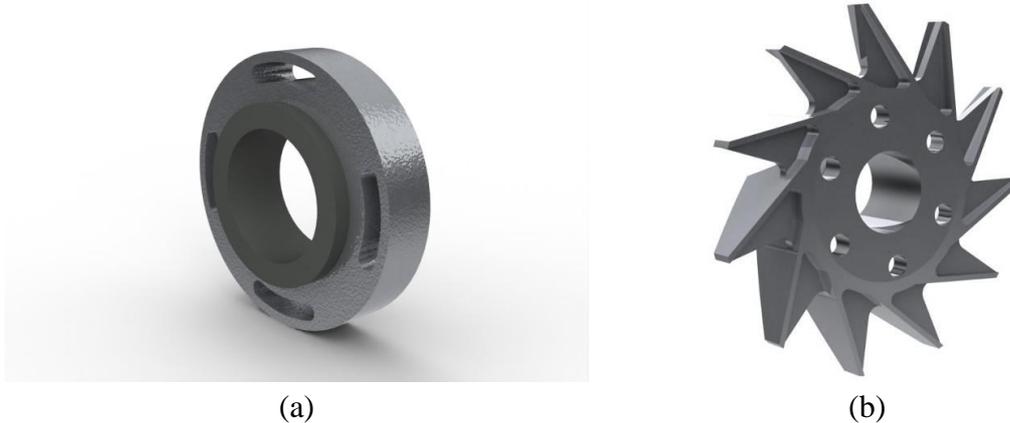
Construction elements on the screw-centrifugal stage. a) bearing; b) centrifugal
